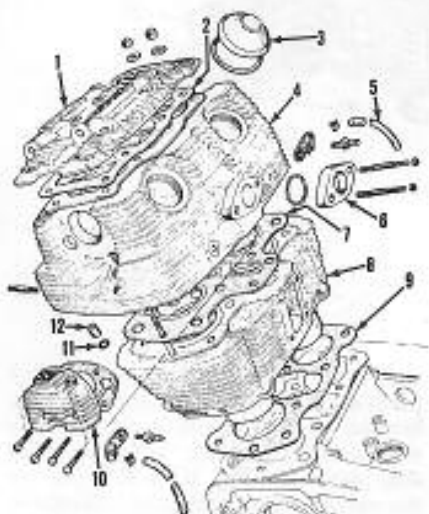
Exploded view of cylinder, cylinder head and related parts.
